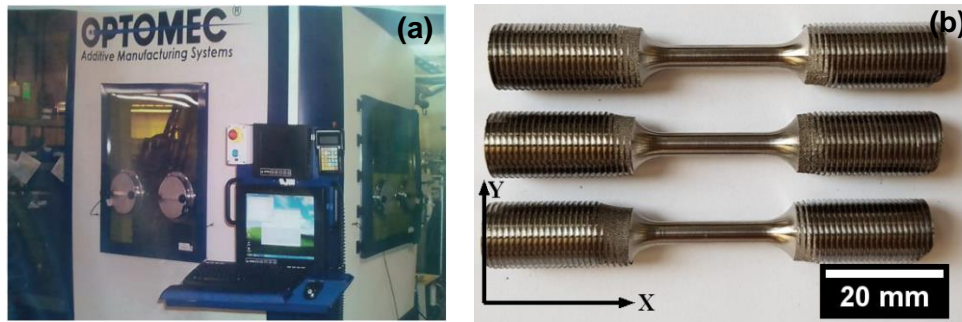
(a) Optomec LENS™ 850-R system [48], and (b) additive manufactured tensile specimens.
